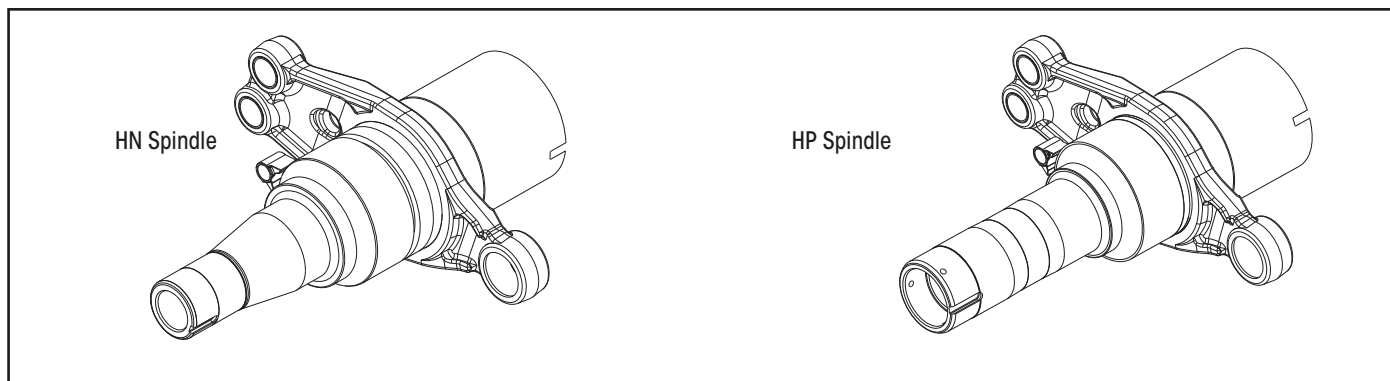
HN Tapered Spindle and HP Parallel Spindle
